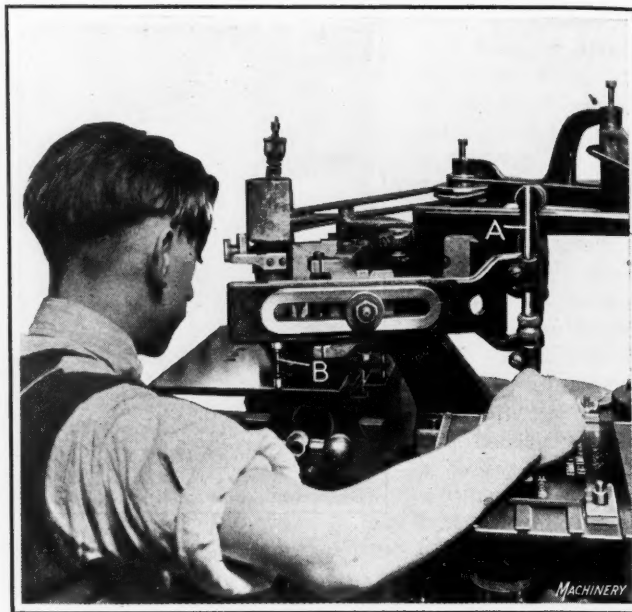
Engraving Bakelite Tuner Panels on Pantograph Engraving Machine
